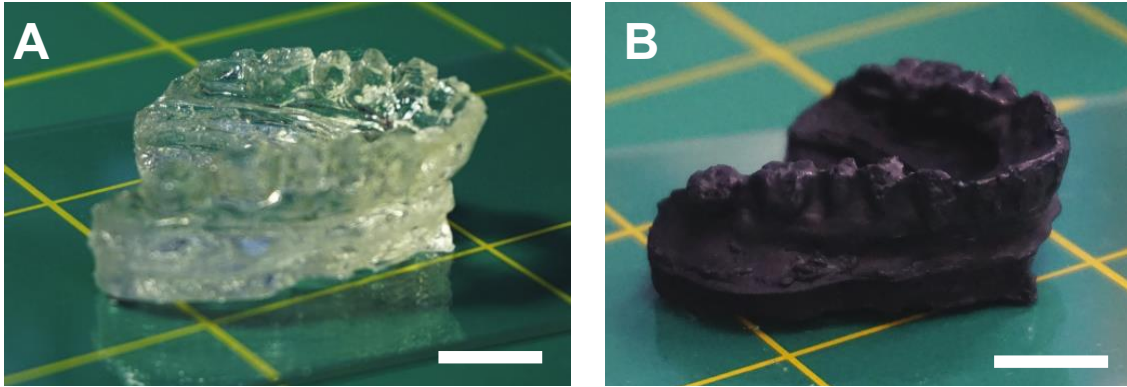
Dental model print. (A) Geometry directly after rinsing and removing. (B) The same part painted for clarity.
